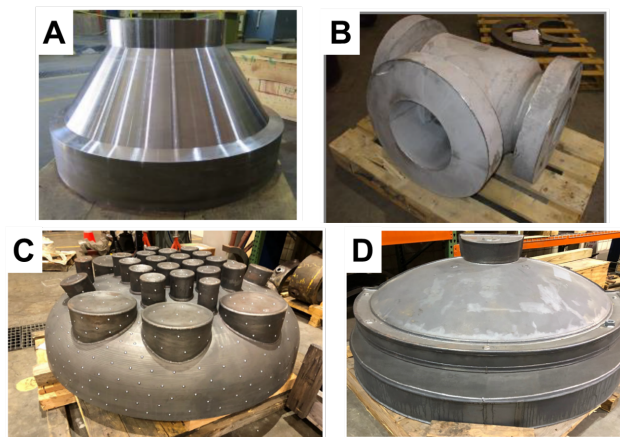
Examples of reactor component mockups produced by PM-HIP. (a) Near-net-shaped feedwater nozzle 406.4 mm (16 in. dia.) for BWR (b) 316L SS valve body (c) upper head (44% scale) made from two halves joined with EBW, and (d) one-half lower reactor head. Image courtesy of EPRI, used with permission. (Gandy et al. 2018)
